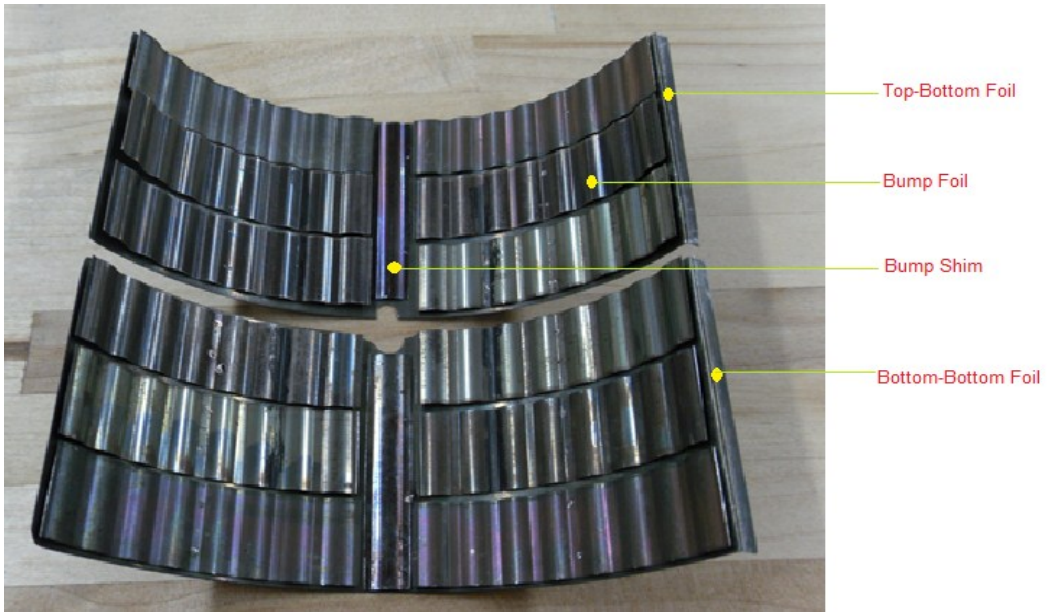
Manufactured Bottom Foil with Bump Foil.
